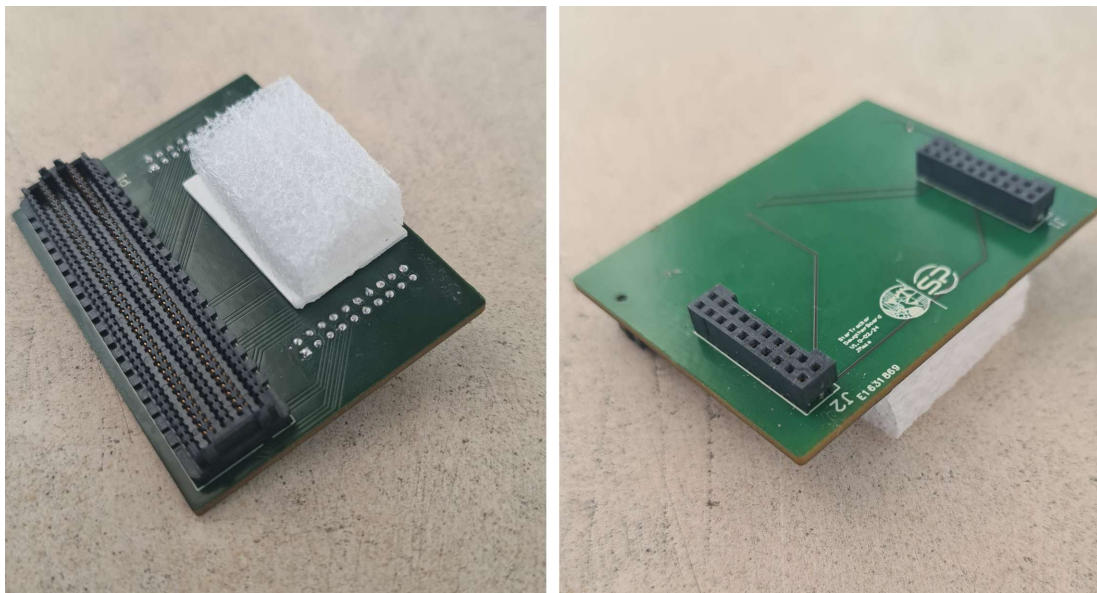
Photograph of the Daughter Board Assembled, (left) bottom layer with FFC connector and (right) top layer with image sensor connectors
